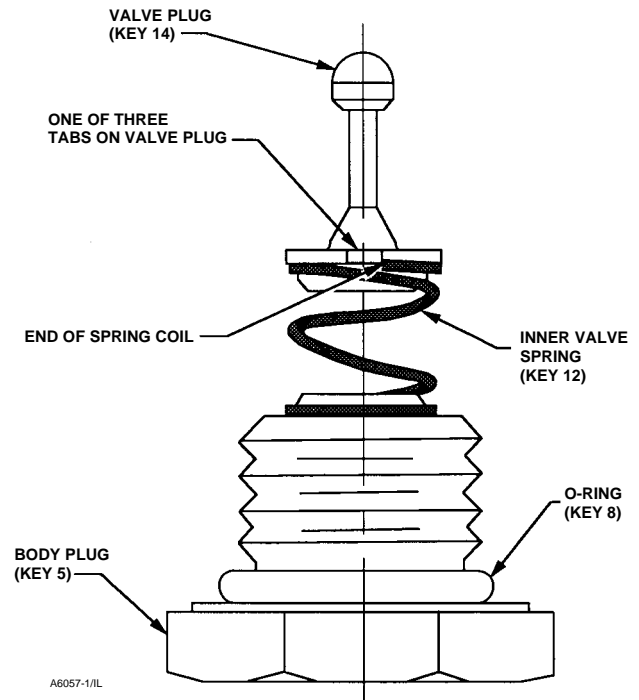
Valve Plug, Inner Valve Spring and Body Plug Assembly
